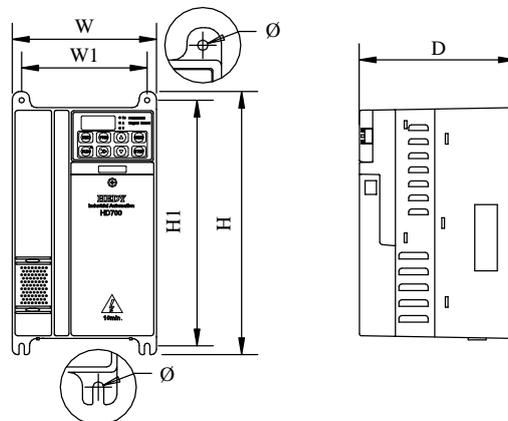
Mechanical dimensions and mounting (Size A, B, C)
